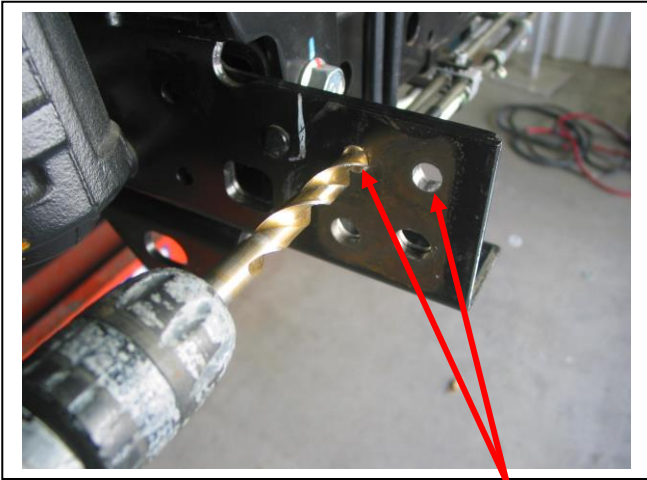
Drivers side shown Drill two 13mm holes top of chassis,
